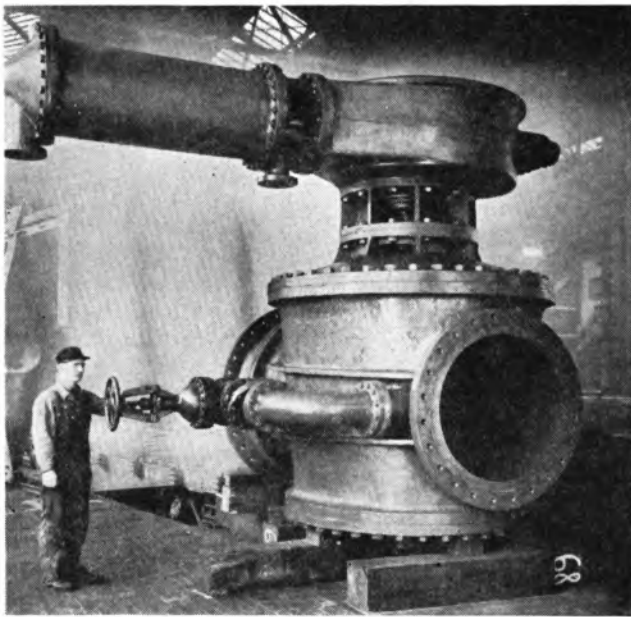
COMPLETE ASSEMBLY OF A 40¹/₂-IN. BY 53⁷/₈-IN. RESEATING HYDRAULIC CONE VALVE; PELTON WATER WHEEL COMPANY
